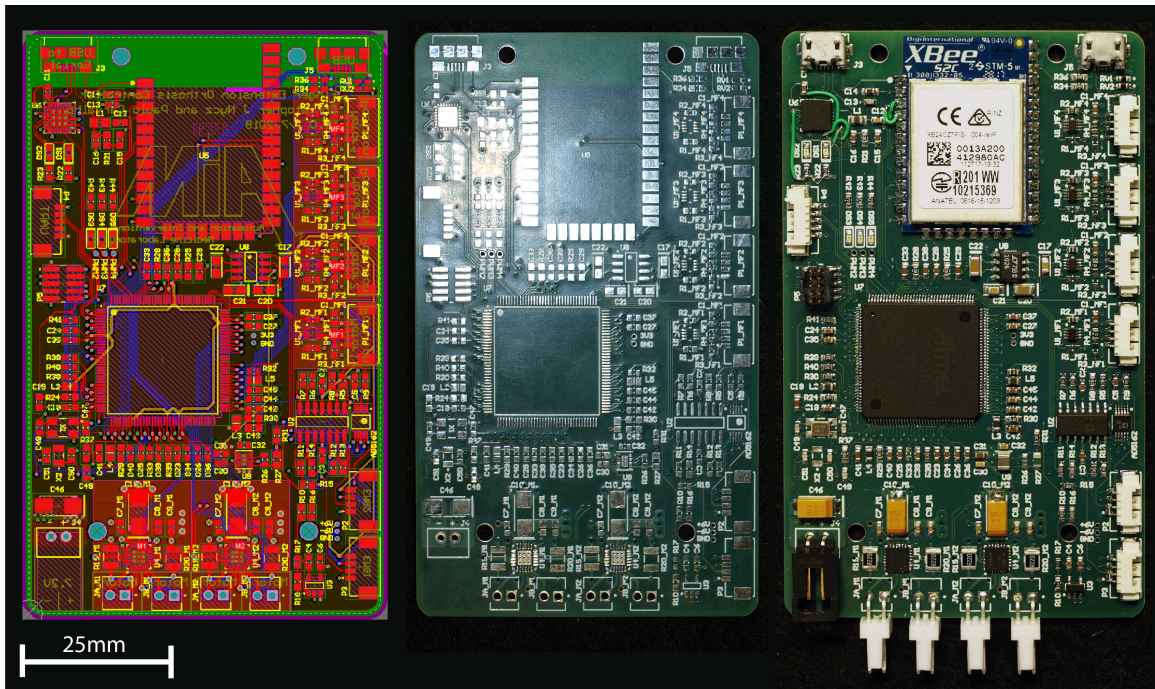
Constructed extension orthosis control board. (Left) PCB layout, (Center) printed circuit board, (Right) populated circuit board.
